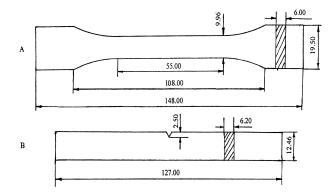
Shape and dimension of injection specimens: (A) tensile specimen; (B) impact specimen.
